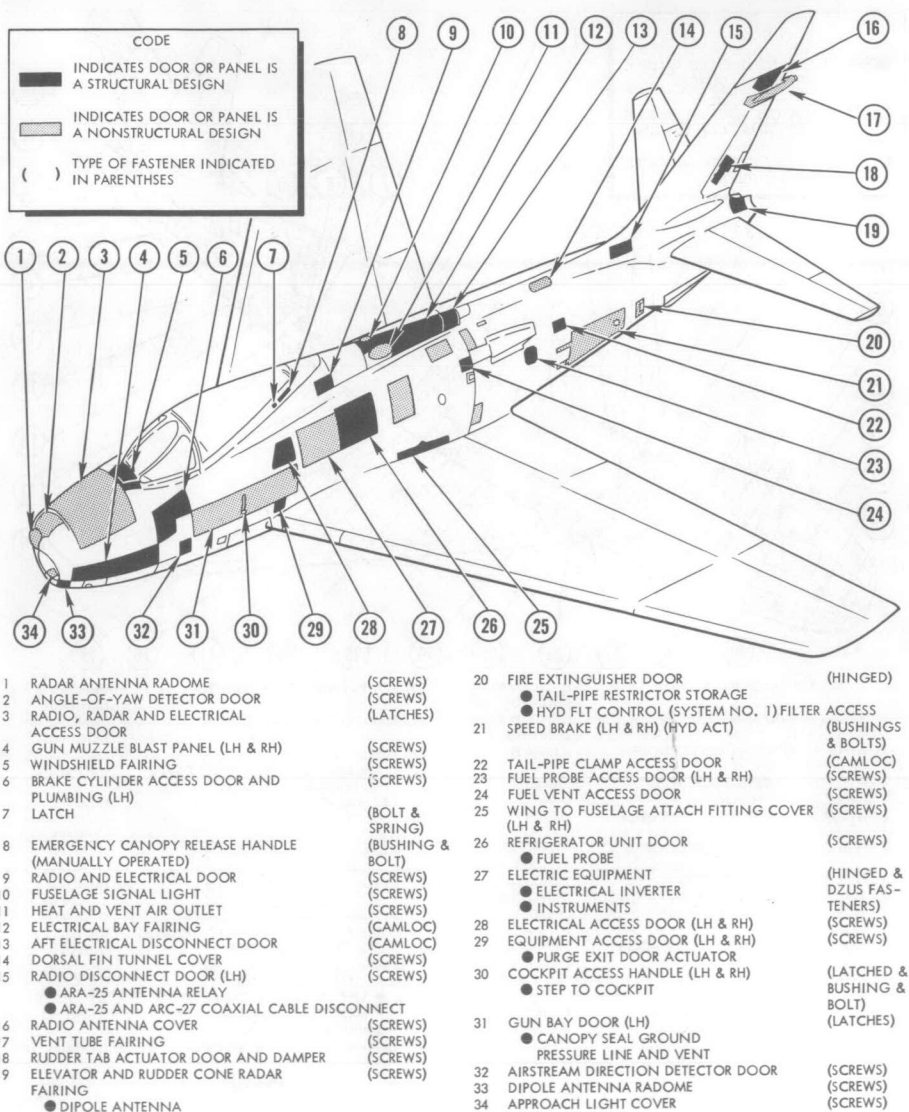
Access and Inspection Provisions (Sheet 2)
